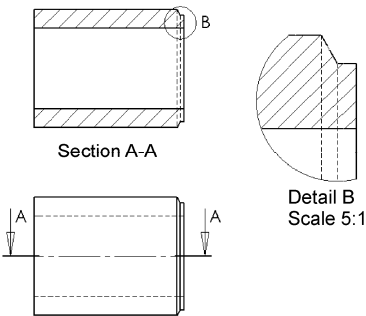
Preparation of the edges for laser welding (butt joint) of a tube made of DMV 617 mod alloy
